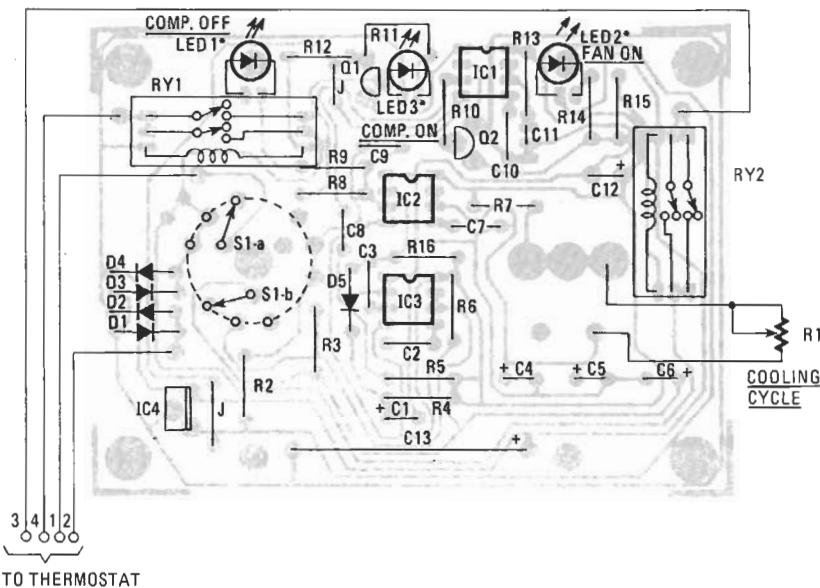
PARTS-PLACEMENT diagram. The three LED's (marked by *) are mounted on the foil side of the board, as is R1, the COOLING-CYCLE control.
